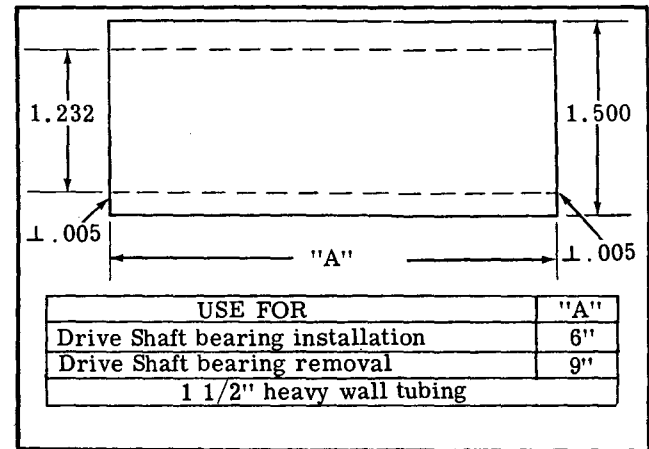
Special Shaft Bearing Removal and Installation Tools.
